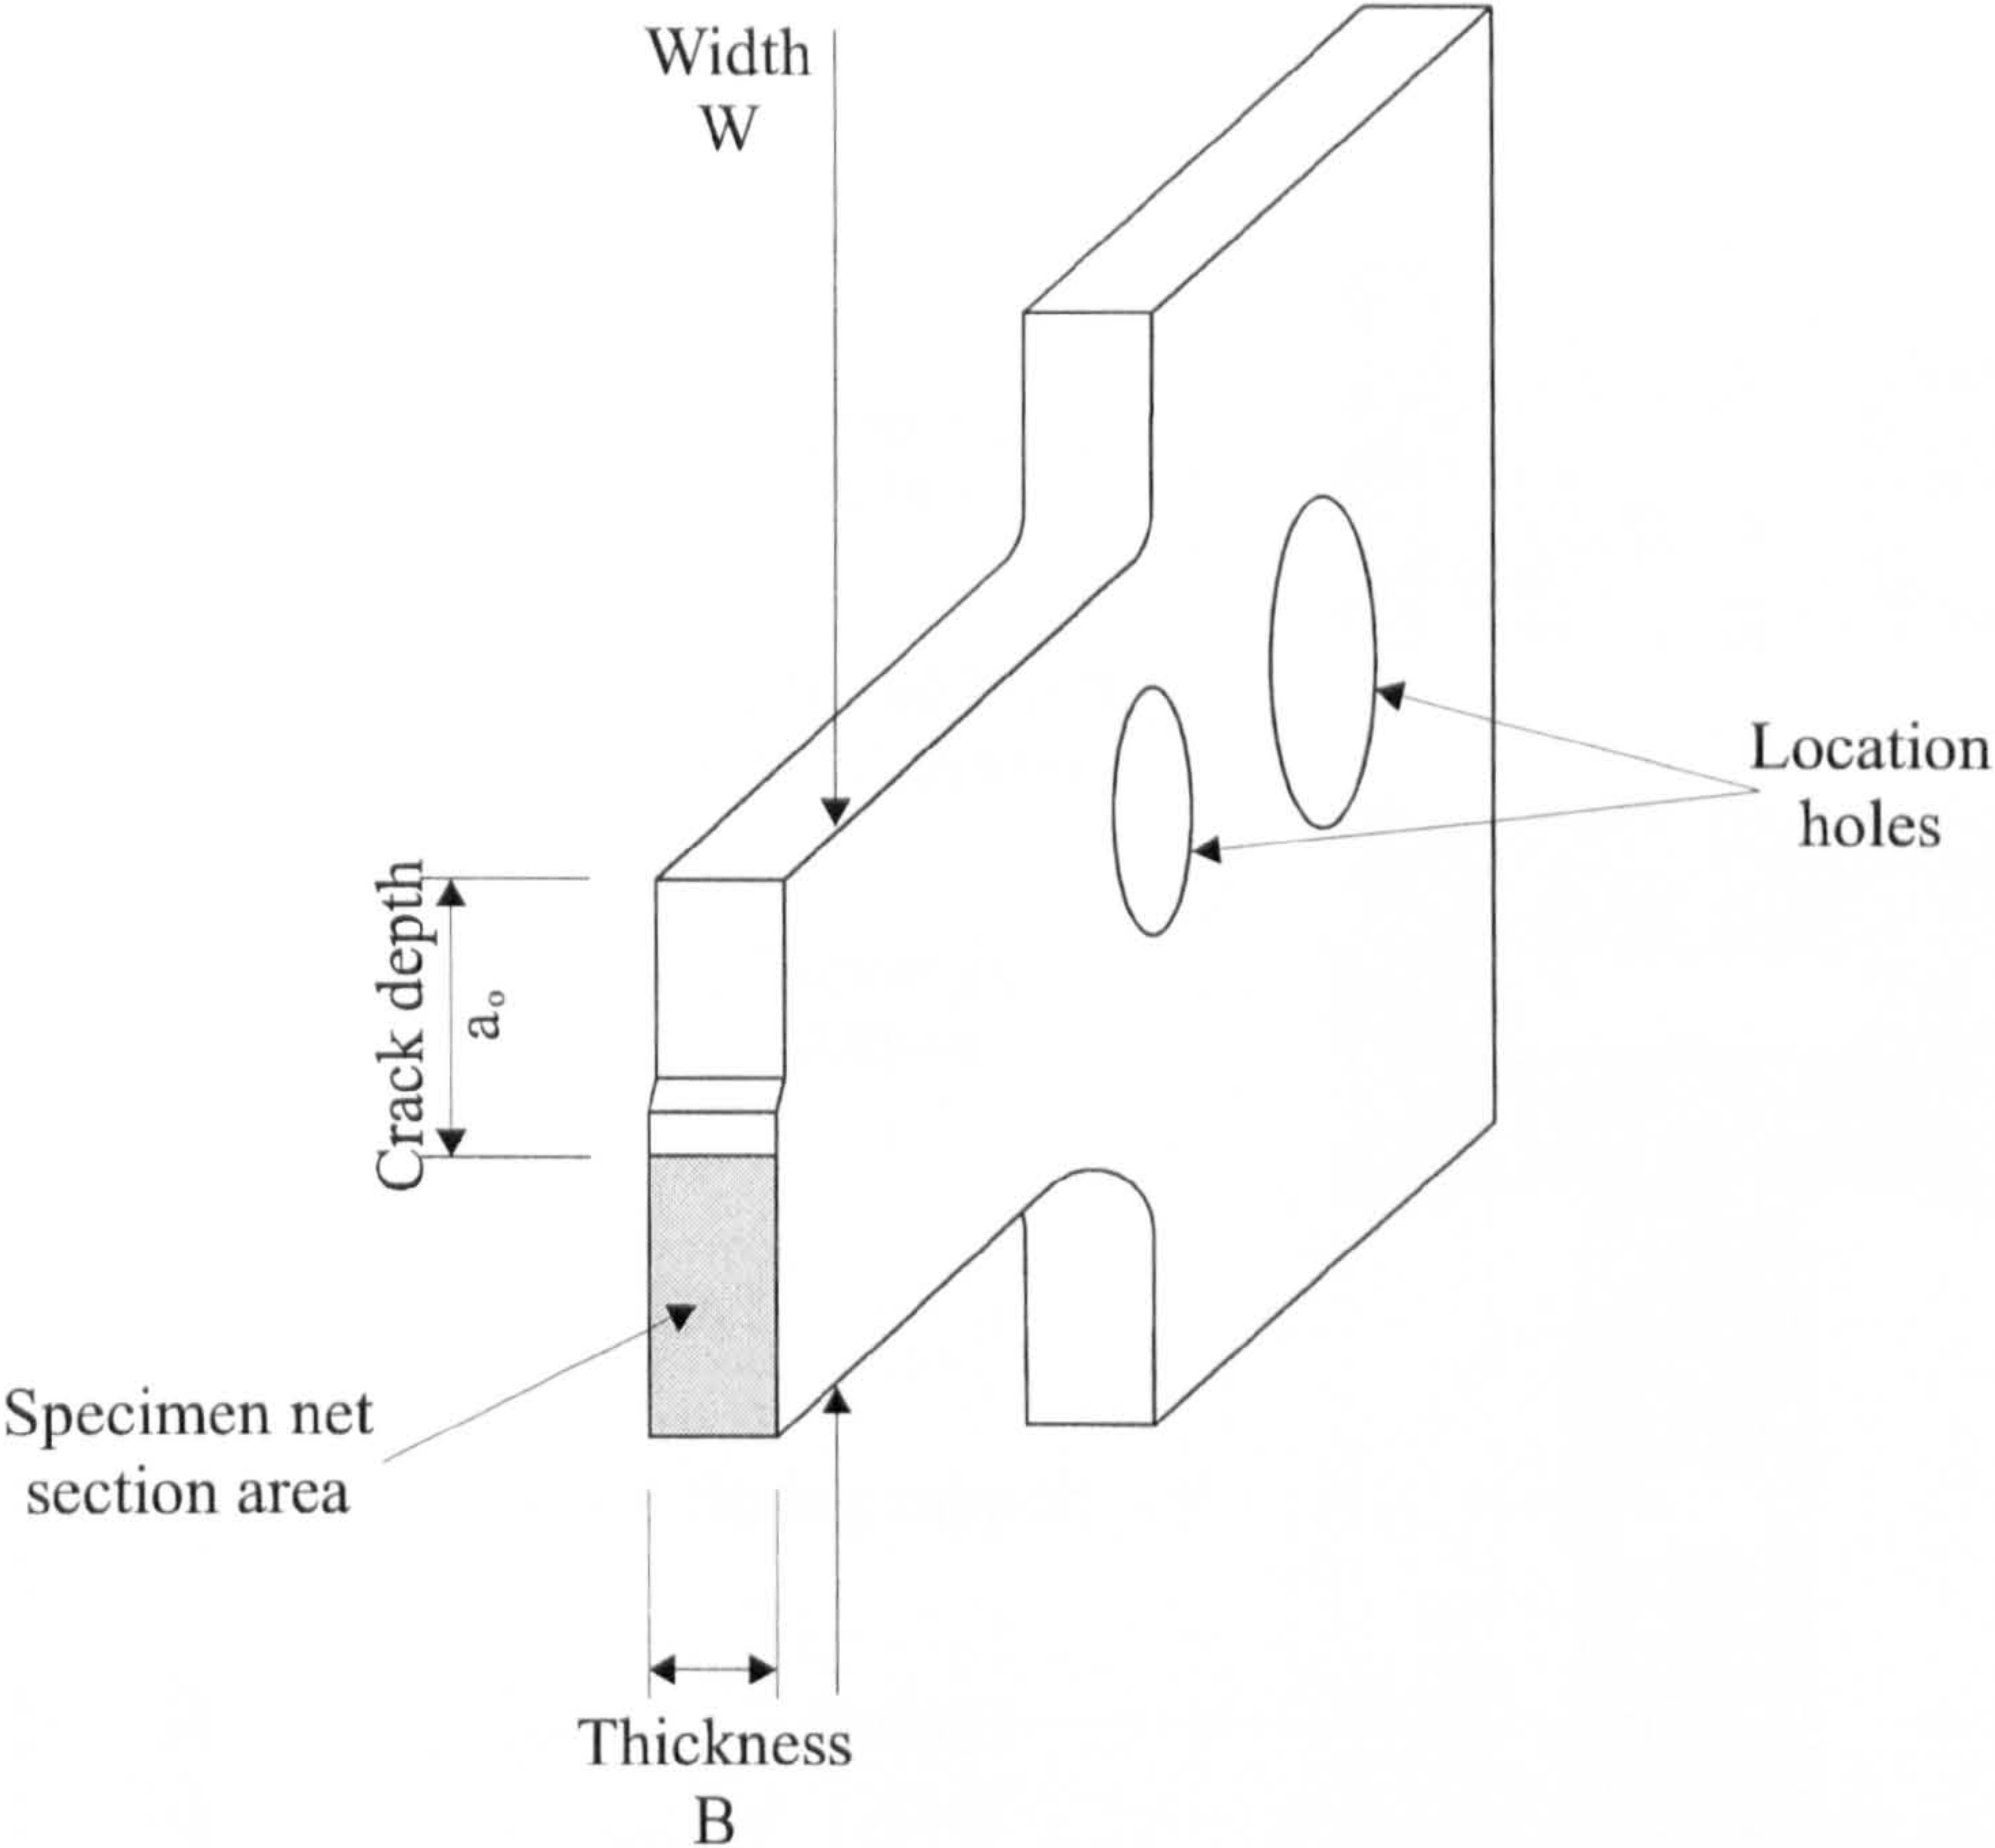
Dog-Bone SEN Specimen, Sectioned about the Plane of the Crack
